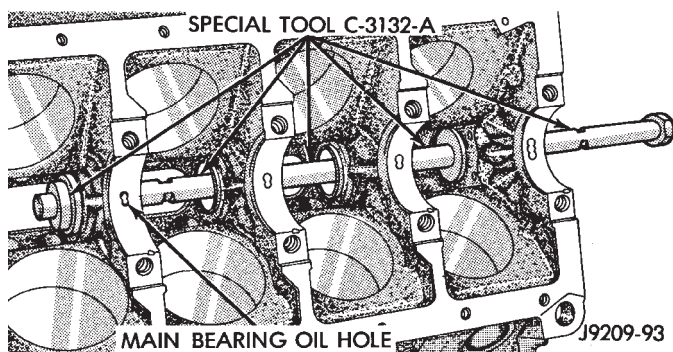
Camshaft Bearings Removal/Installation with Tool C-3132-A
